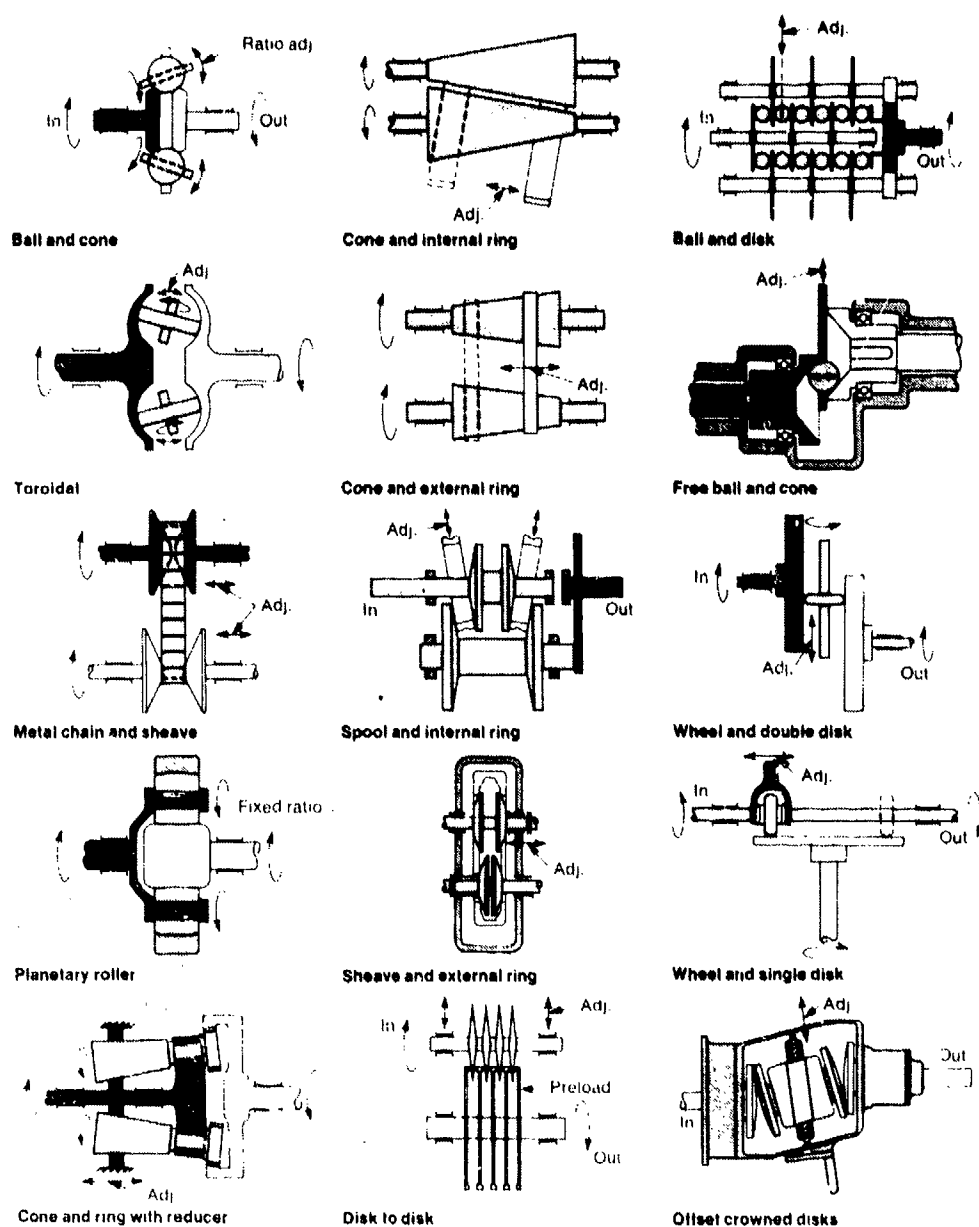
Typical industrial traction-drive geometries. (Courtesy of Design Engineering (ref. 4).)
